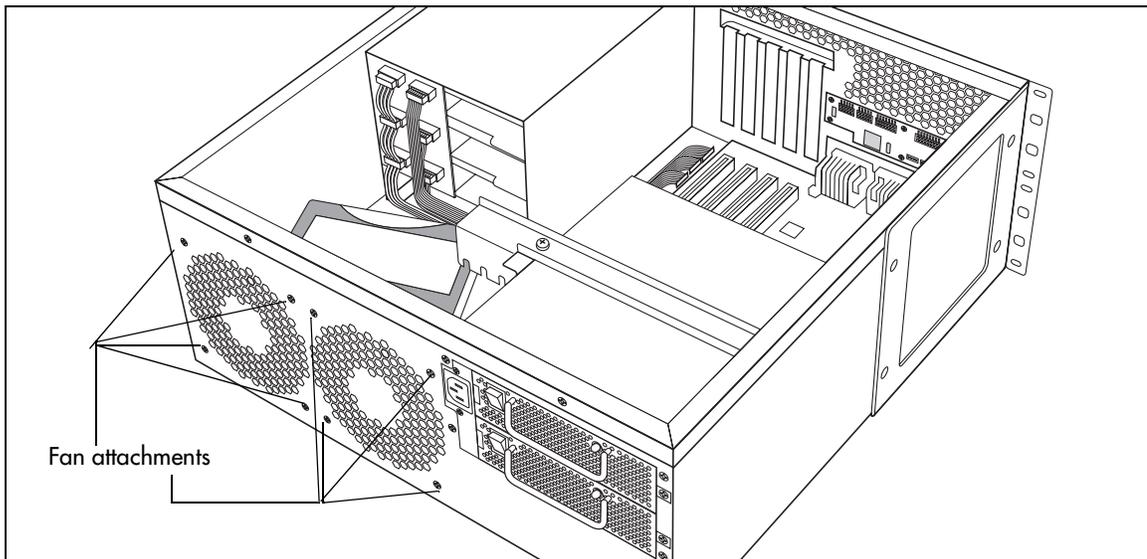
Screw attachments beside fan holes (BCM1000 version 2.5 redundant model)
